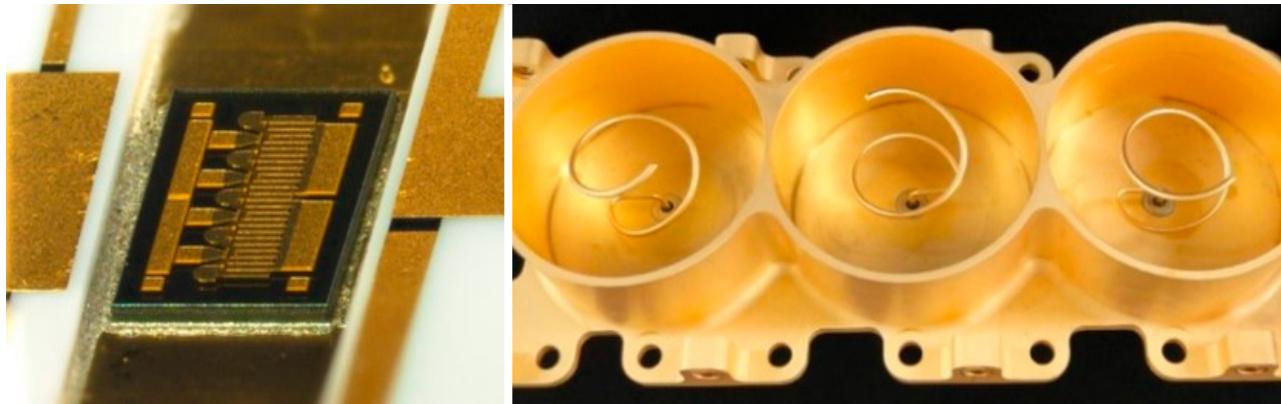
Eutectic die bonding examples. Left, a GaAs die eutectically mounted to a gold-plated copper-molybdenum-copper package using 80Au/20Sn solder preform for the IMAP mission. Right, hermetic feedthroughs eutectically mounted to gold-plated aluminum housing using 80Au/20Sn solder preform for the Europa Clipper fan beam antenna.
